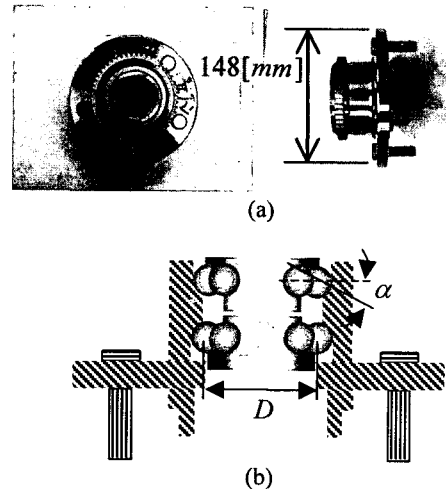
Photographs of Hub bearing (a) Top view (left-hand side), side view (right-hand side), (b) Schematic diagram of the hub bearing, where α is contact angle and D is pitch diameter
